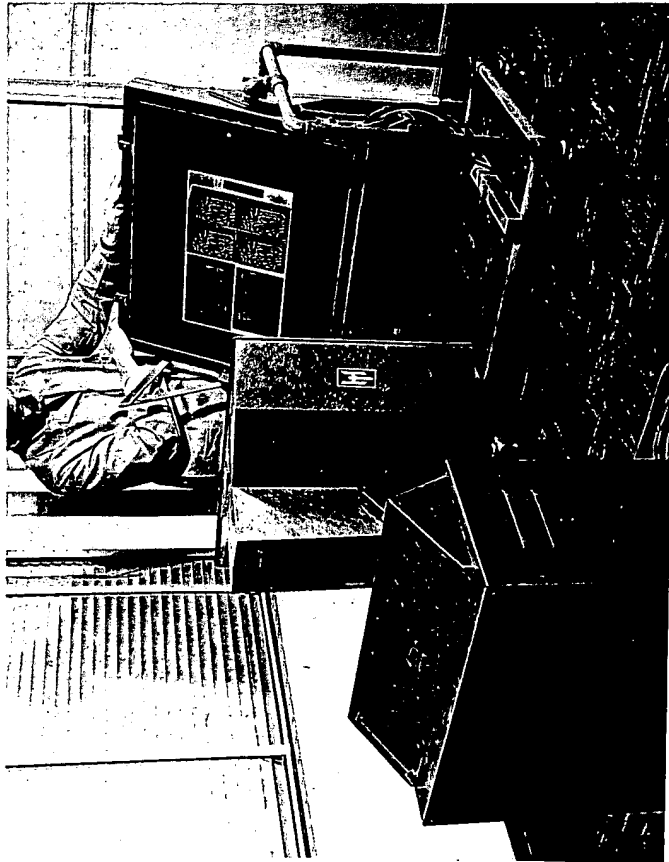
Photoengraving process of printed circuit board fabrication. (Eastman Kodak Company)
